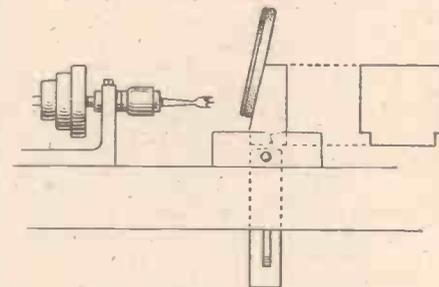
Set up for boring the holes for the legs in the stool seat.
